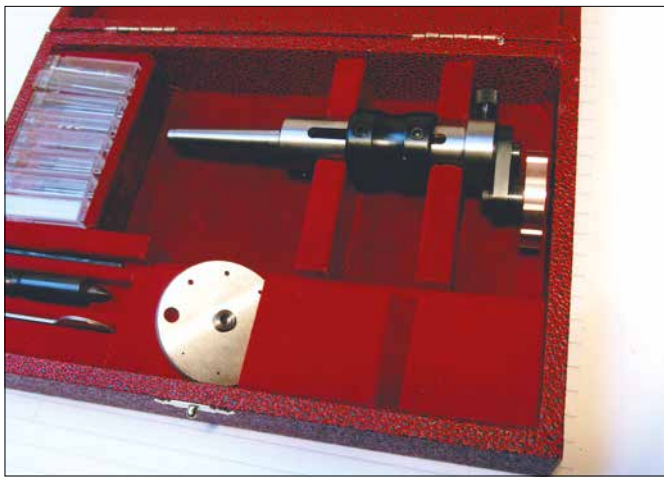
C. The complete tool in a fitted case with drills and drill plate.
